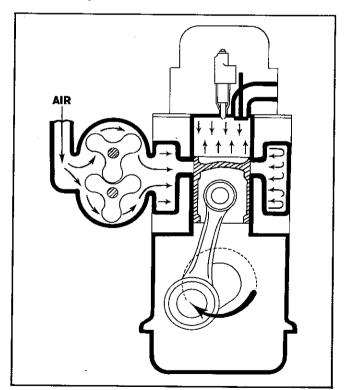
Air Being Compressed with Exhaust Valves Closed.
